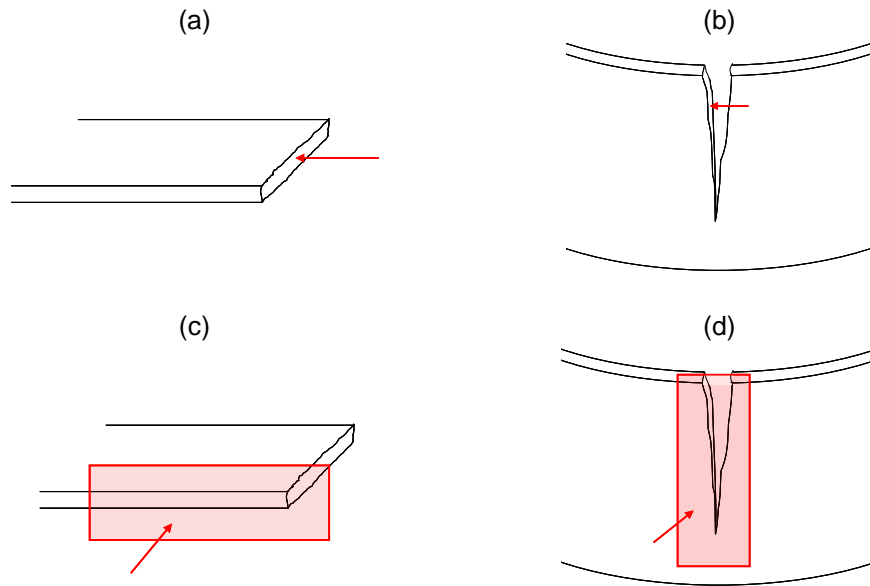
Different observations: fracture surface of Gleeble specimen (a) and cracked cup (b), longitudinal section of Gleeble specimen (c) and surface of cracked cup
